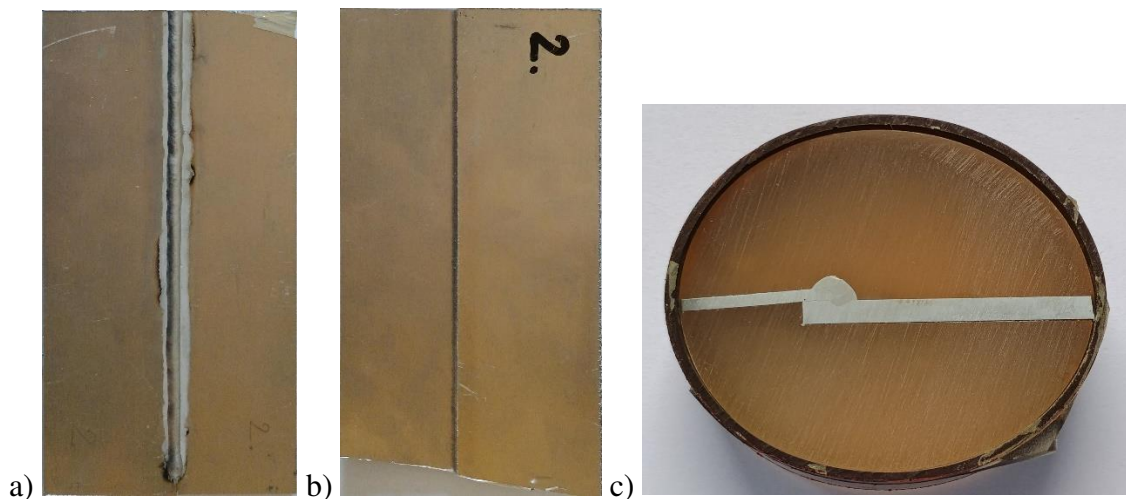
Lap joint of 1 and 2 mm thick sheets using the MIG method: a) weld face, b) weld root, c) metallographic section.
